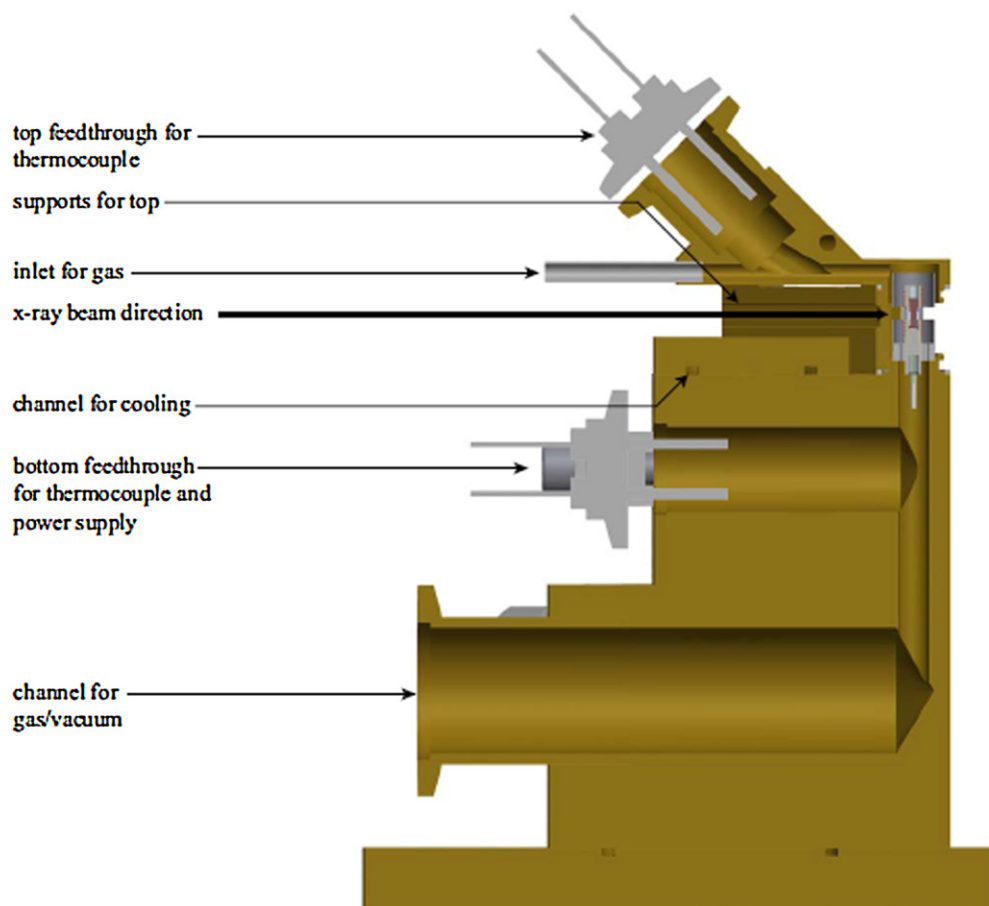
Cut-out view of the 3DXRD furnace. Different parts of the furnace are indicated. One thermocouple is spot welded on top of the sample.
